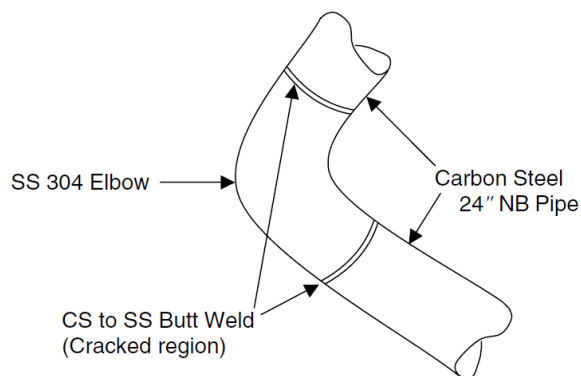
Schematic illustration of the weld joints between the CS pipe and SS 304 elbow where cracking occurred
